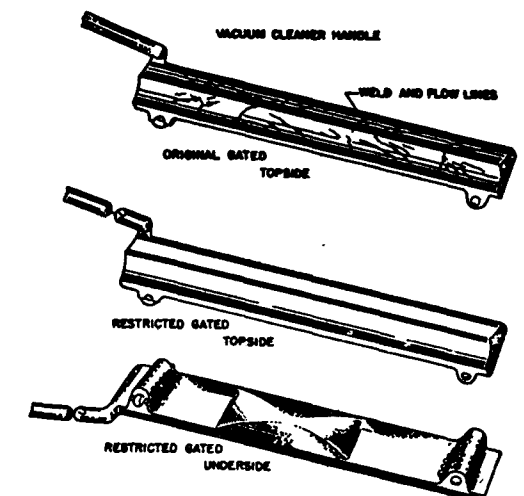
RESTRICTED GATING (CENTER AND BOTTOM DRAWINGS) IMPROVED QUALITY OF MOLDED PIECES.
